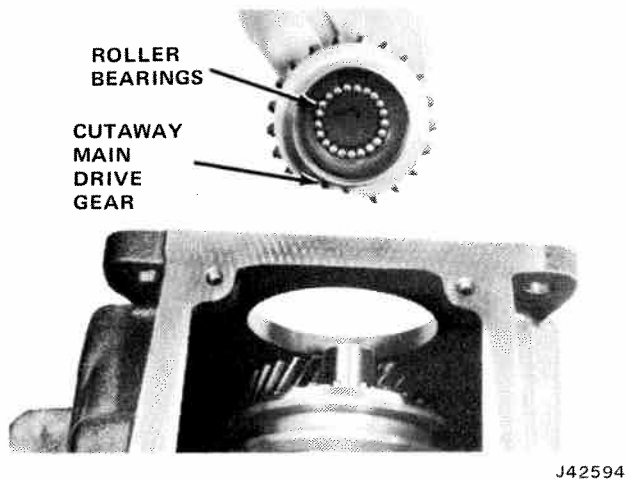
Main Drive Gear Roller Bearing Installed
